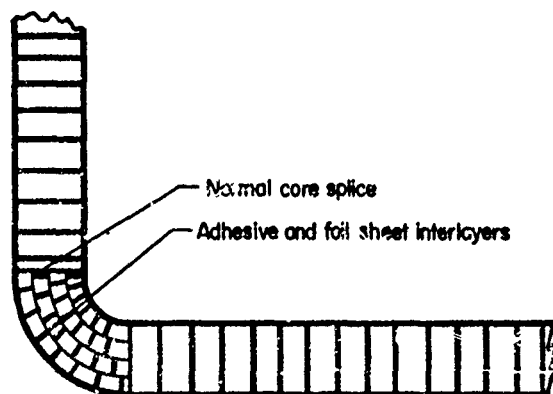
, 1-12. DESIGN FOR A HONEYCOMB EDGE JOINT(27)
